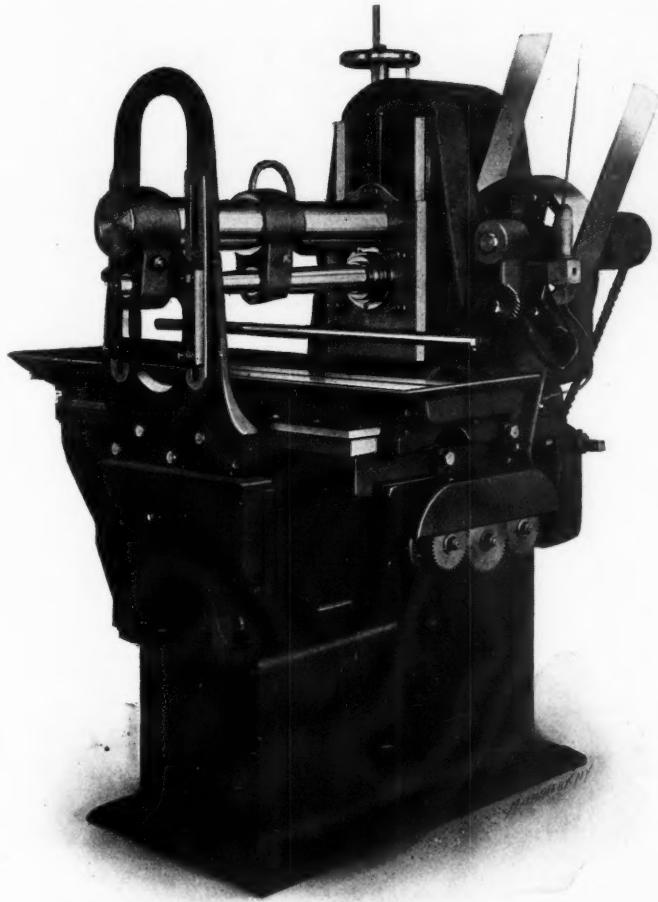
No. 9 Automatic Index Milling Machine built by the Garvin Machine Co.
